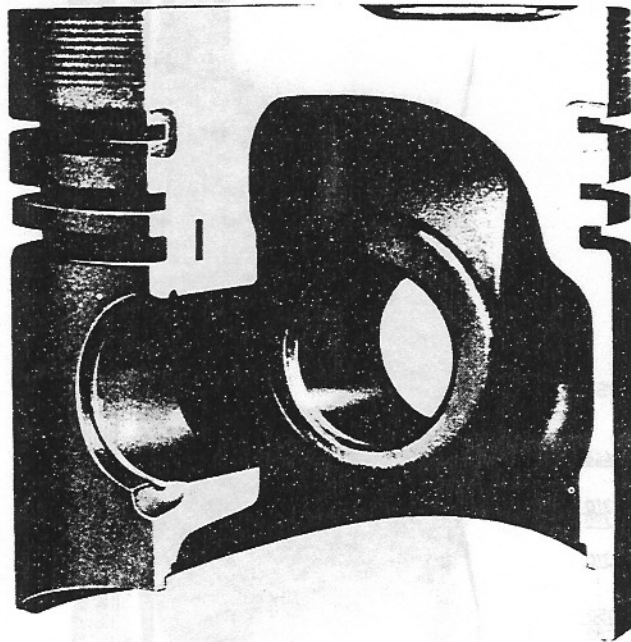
Mahle Autothermic Piston with Ring Carrier
